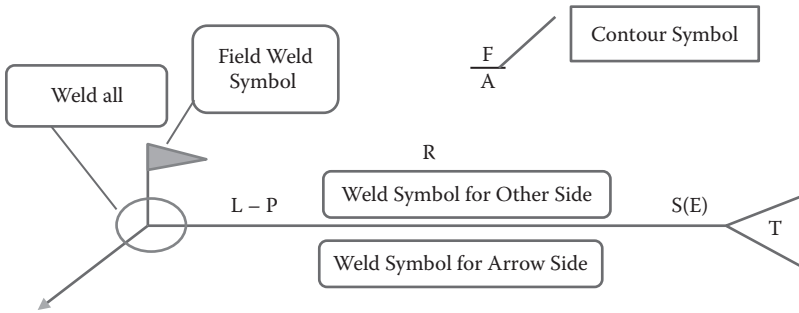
Welding arrow configuration. L, weld length; F, finish symbol; P, pitch center to center spacing; A, groove angle; S, depth of bevel; R, root opening; E, groove weld size; T, welding symbol or supplementary information.
